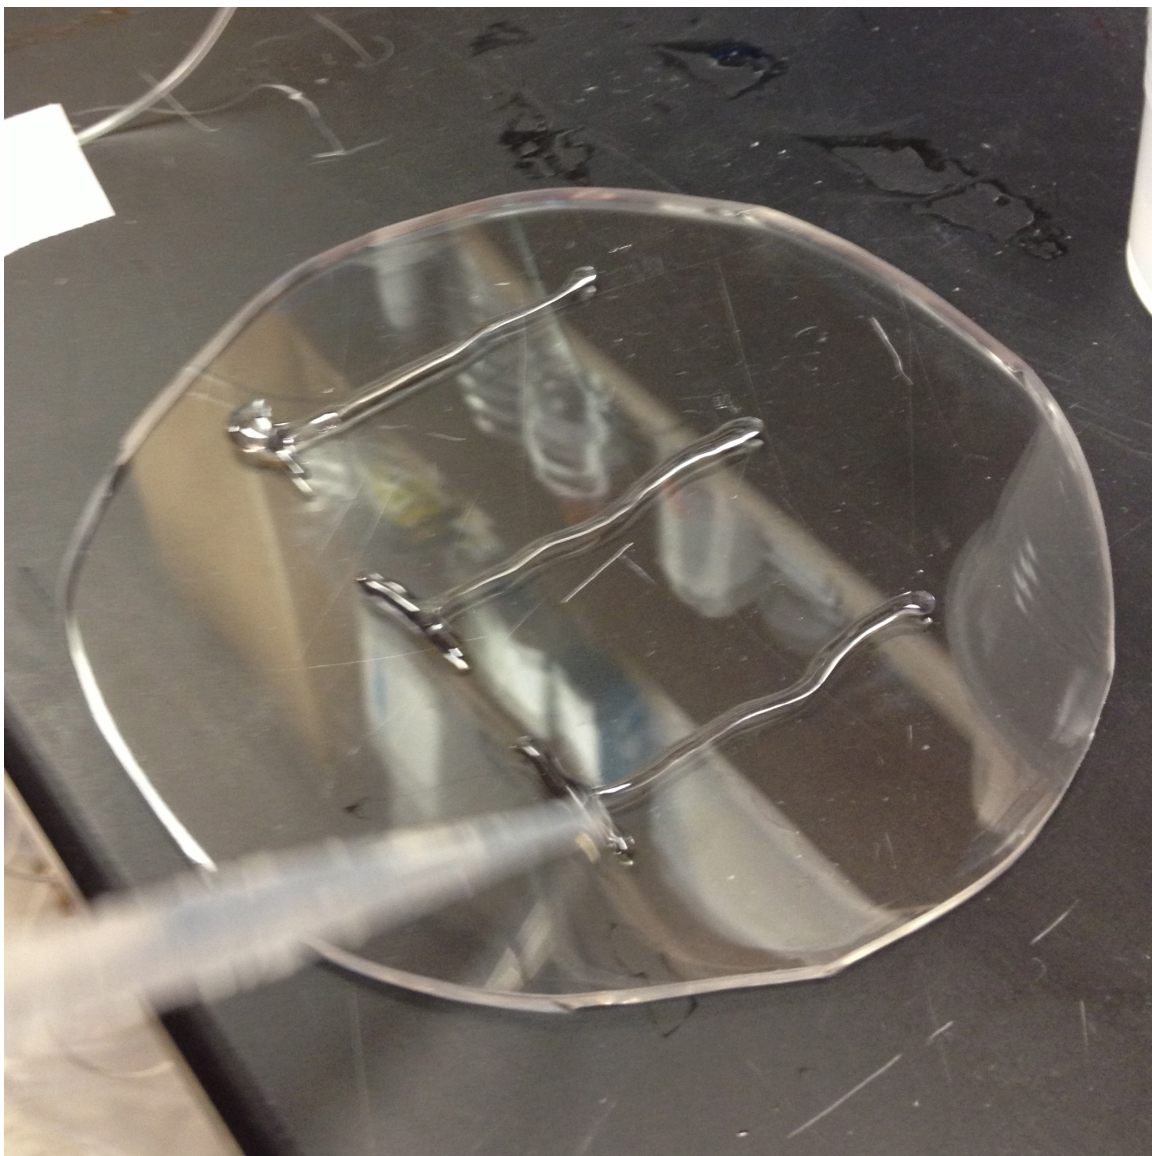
Bulb pipette injecting degassed epoxy slowly into a mold with tube assemblies.
